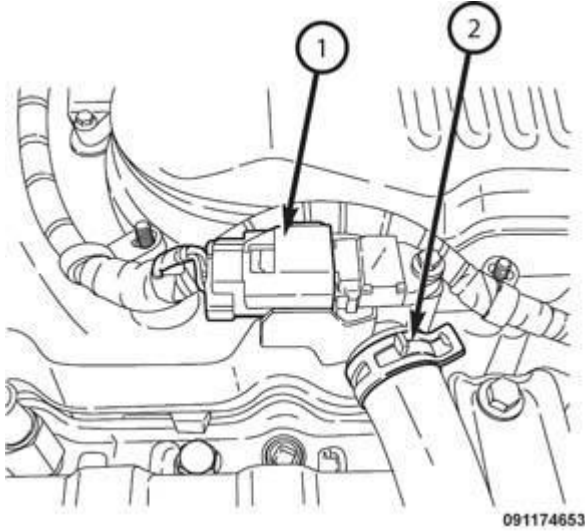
Crankcase Pressure Sensor Wire Harness Connector & Clamp
